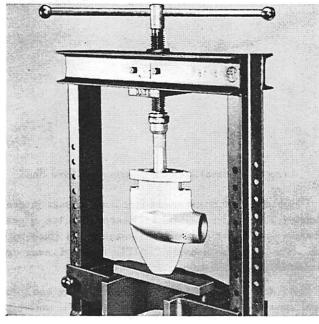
Removing Drive Shaft and Ball Bearing from Pinion Gear
